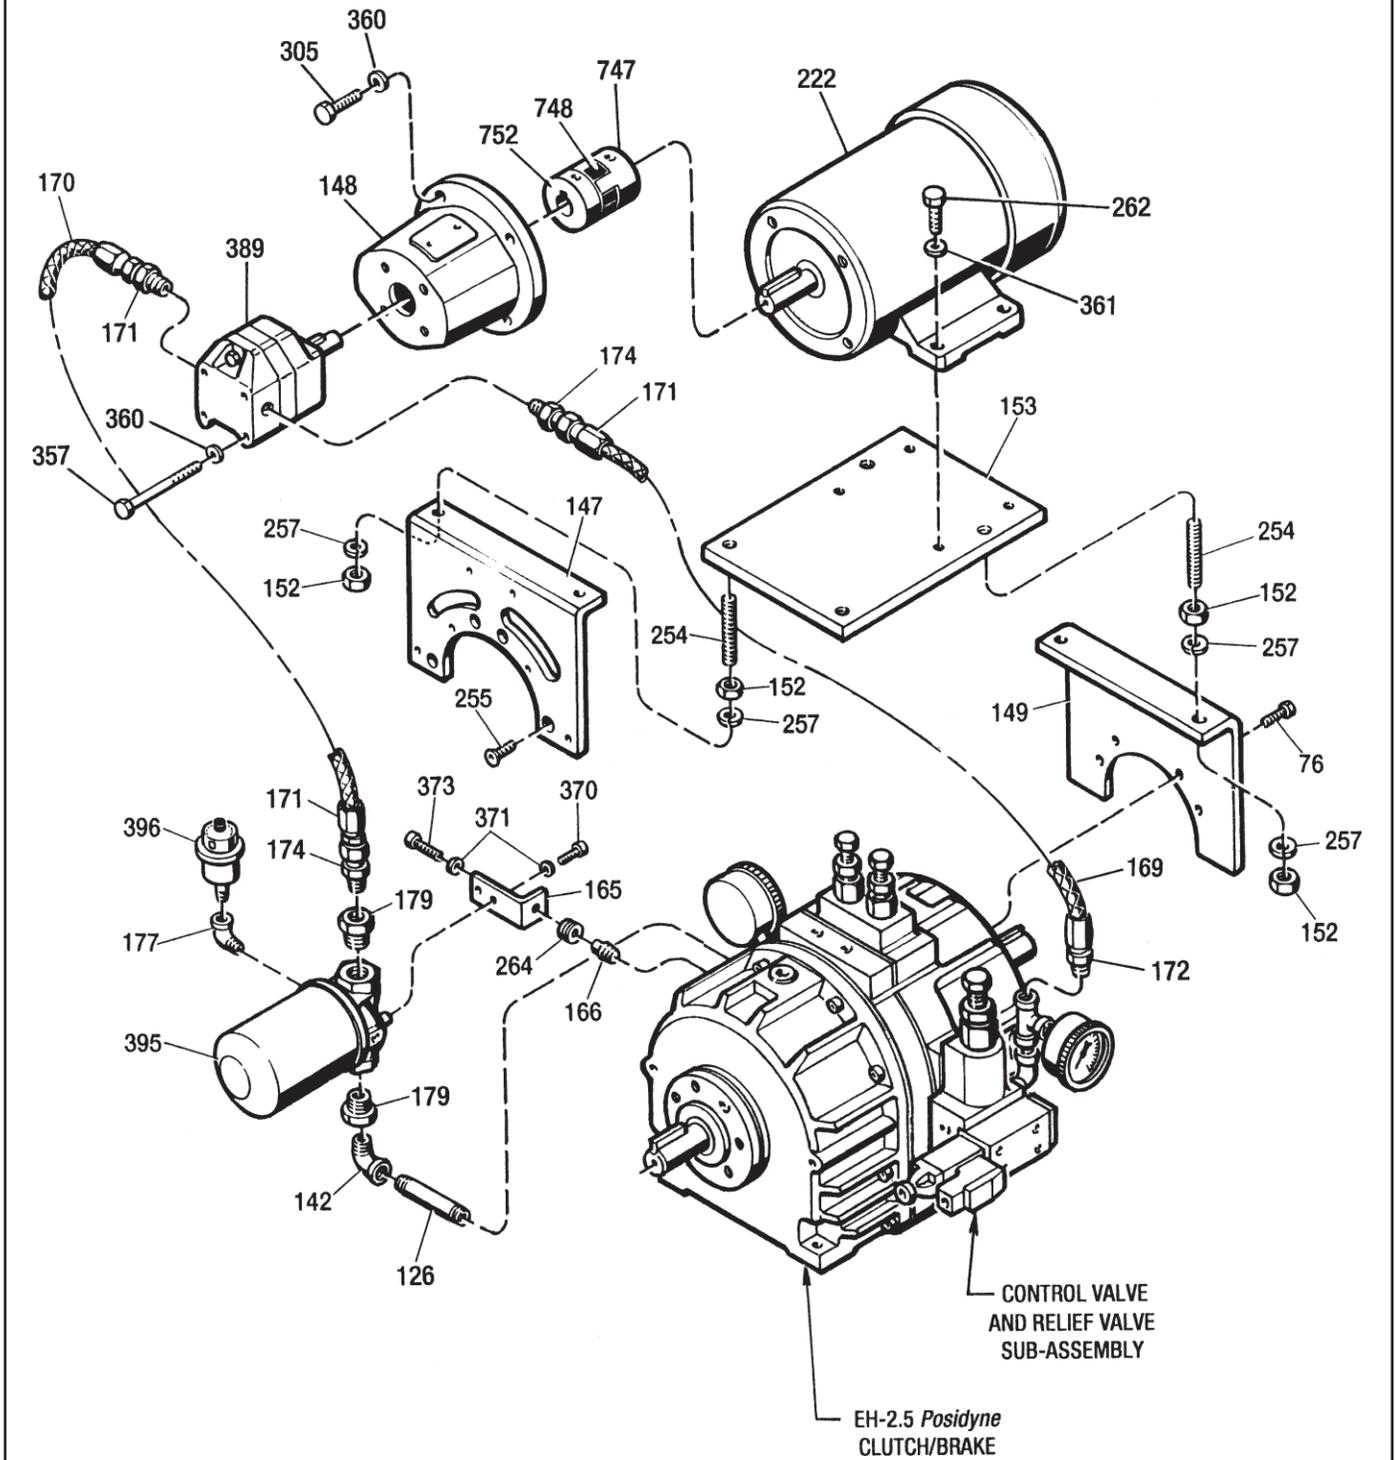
Piggyback Mounting/ Motor Driven Pump
